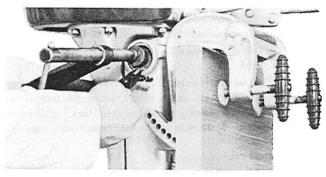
Compressing Mount & Removing Retainer Ring B. Removing Drive Shaft Housing from Saddle Mount
